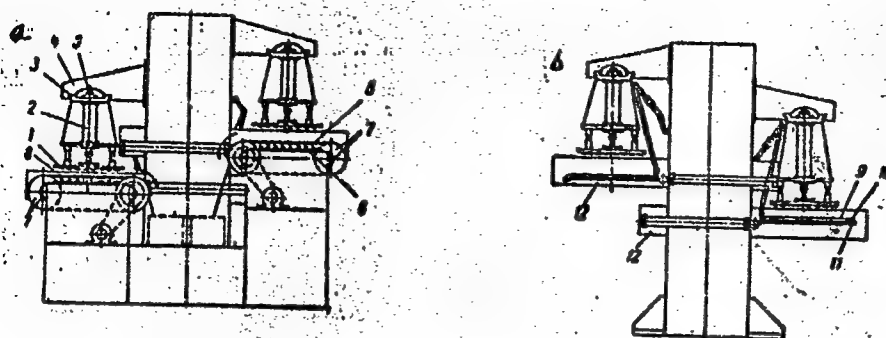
1 - Vacuum cartridge; 2 - cylinder; 3 - carriage; 4 - support; 5 - screw couple; 6 - spindle magazine; 7 - conveyor; 8 - conveyor belt of specified length; 9 - middle part of die; 10 - projections on the middle section; 11 - catches; 12 - guides of the press.
